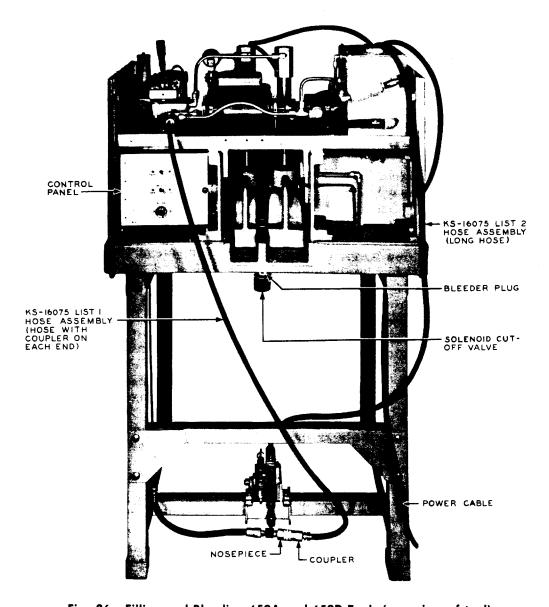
Filling and Bleeding 659A and 659D Tools (rear view of tool)
